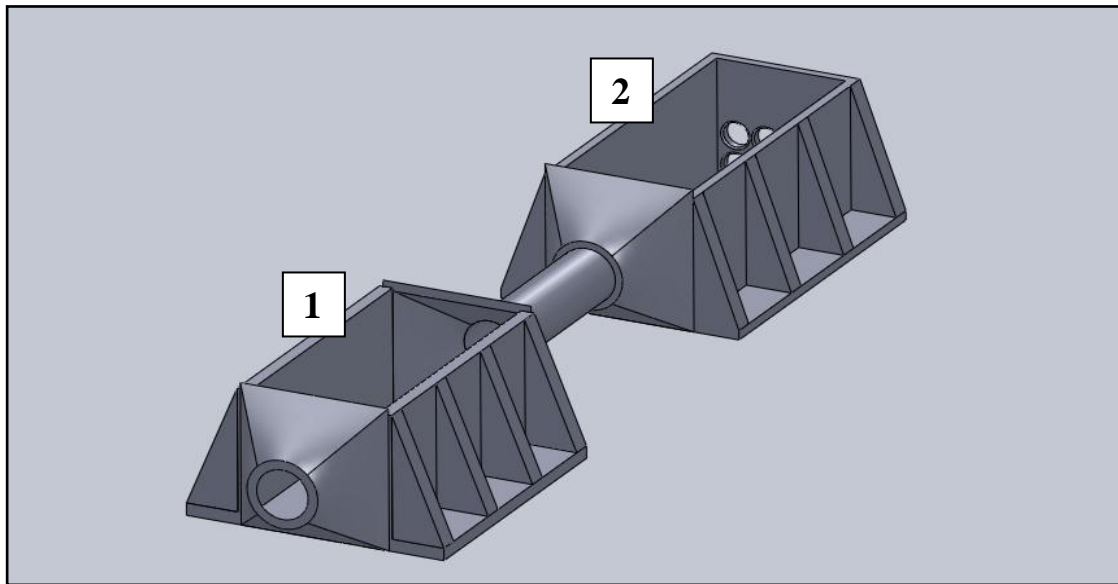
Double Tank Circular Diffuser Design 3D view
